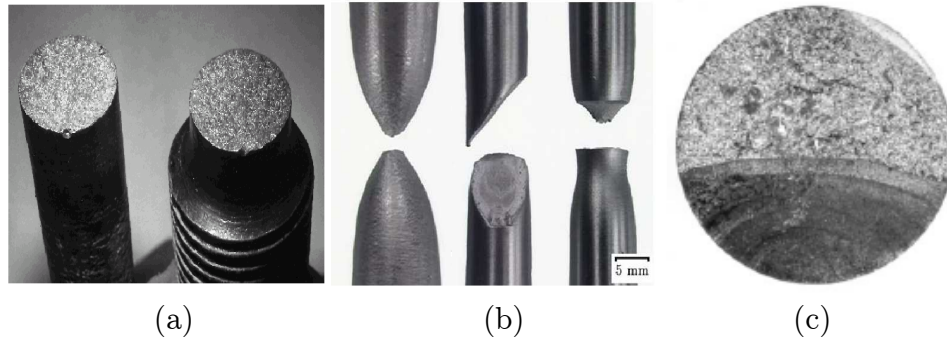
(a) brittle fracture, (b) ductile fracture [76], (c) fatigue fracture [118]
